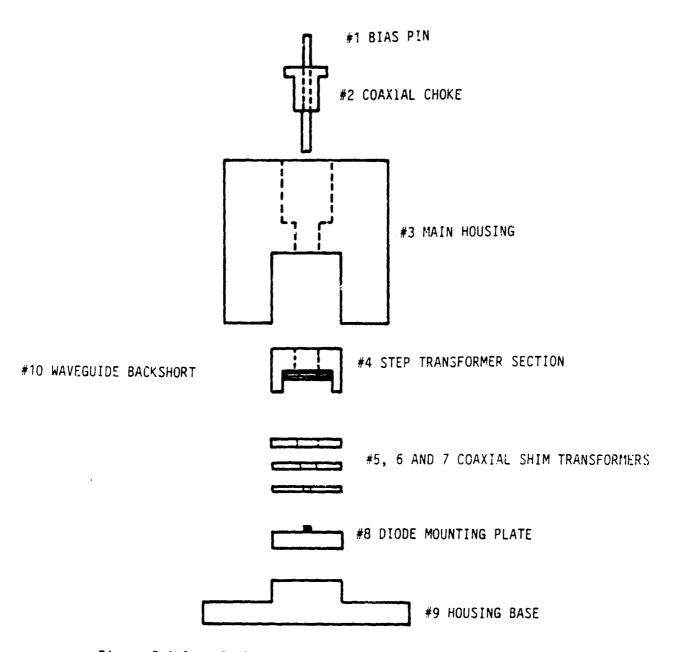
Exploded View of Waveguide Amplifier Circuit Prototype Configuration
